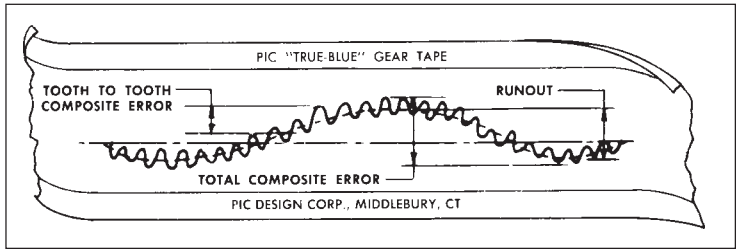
"TRUE BLUE" GEAR TAPE
